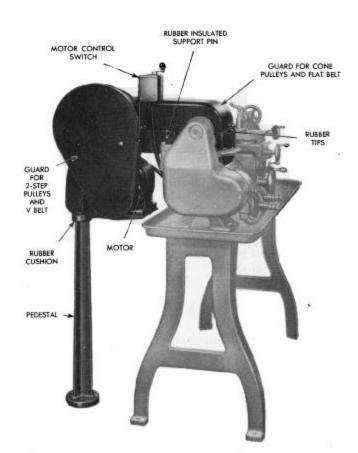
END VIEW OF COUNTERSHAFT ASSEMBLY
